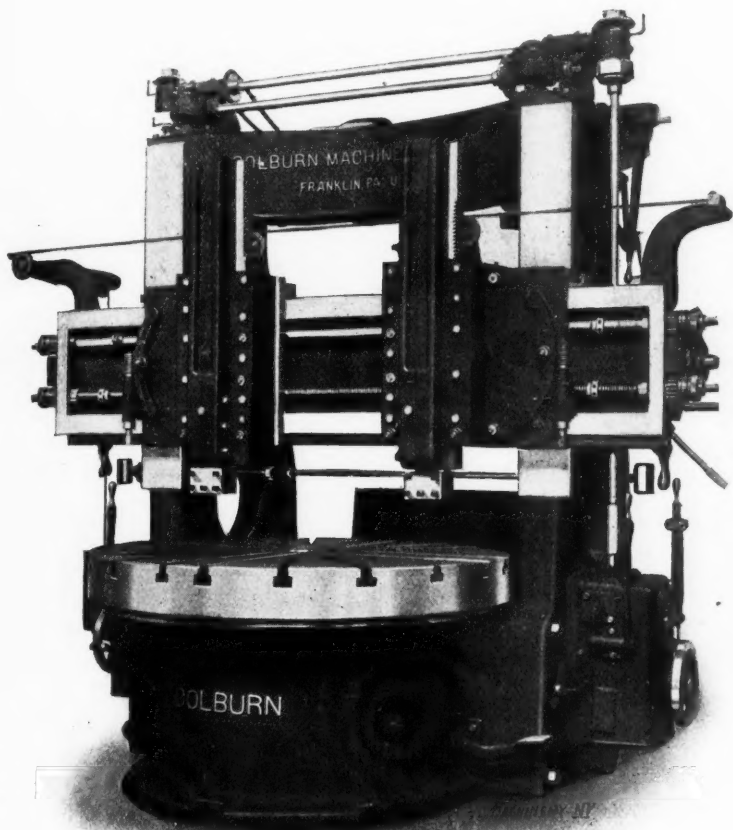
"New Model" 60-inch Colburn Boring Mill
